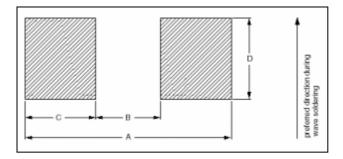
RECOMMENDED FOOTPRINT DIMENSIONS
